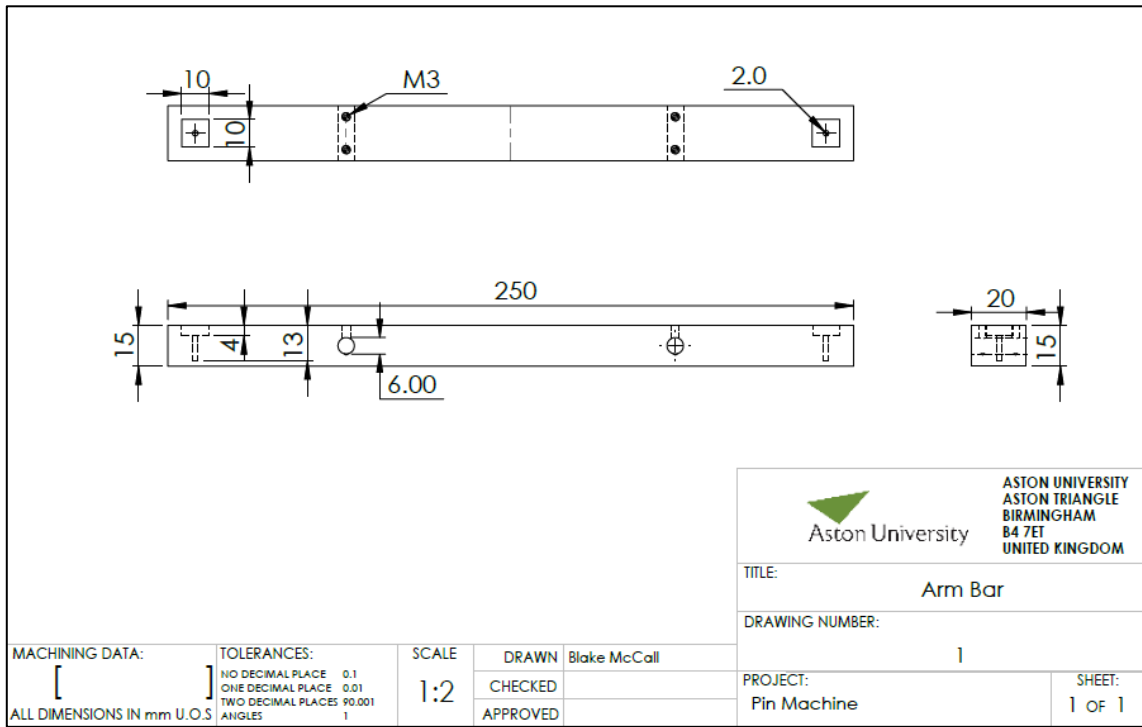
Working drawings of the Arm Bar Component of the Pin Machine
